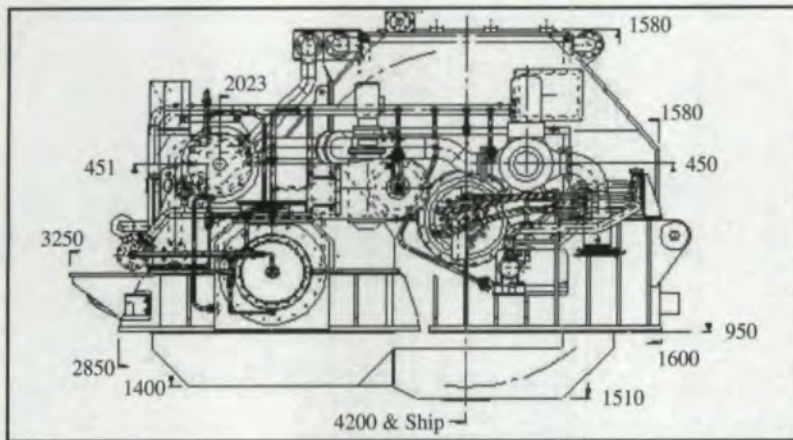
Front view of the portside gearbox. All dimensions in millimeters.
